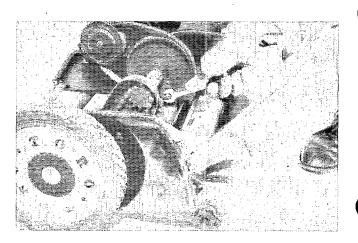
Then loosen the four bolts that hold the counter-shaft in position (Fig. 6) and move the countershaft up by putting a broom handle or a similar stick to lift it as shown in Fig. 7.
